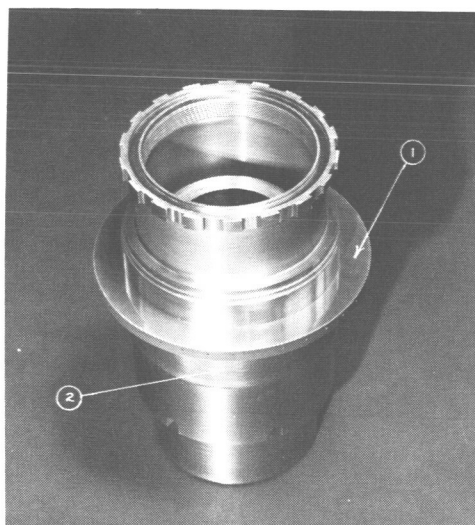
Mainshaft Seal Rig 29,360 - Front Hub Assembly Prior to Final Assembly of Rig. Note: 1. PWA 771 Seal Plate With LCIC Hardface. 2. Roller Bearing Inner Race. XP-63613
